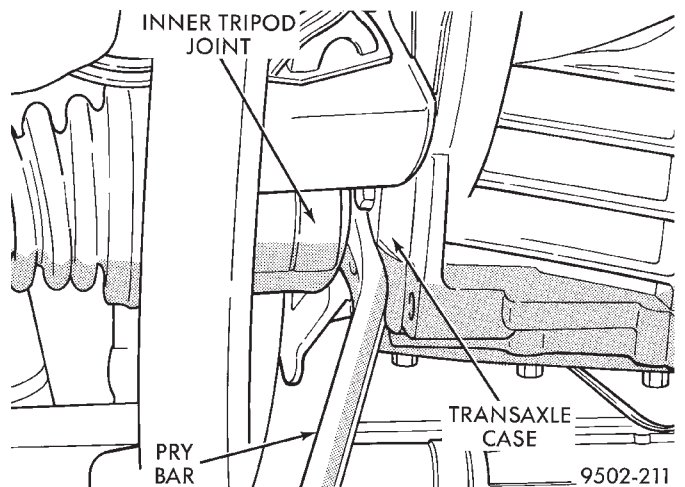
Disengaging Inner Tripod Joint From Transaxle
